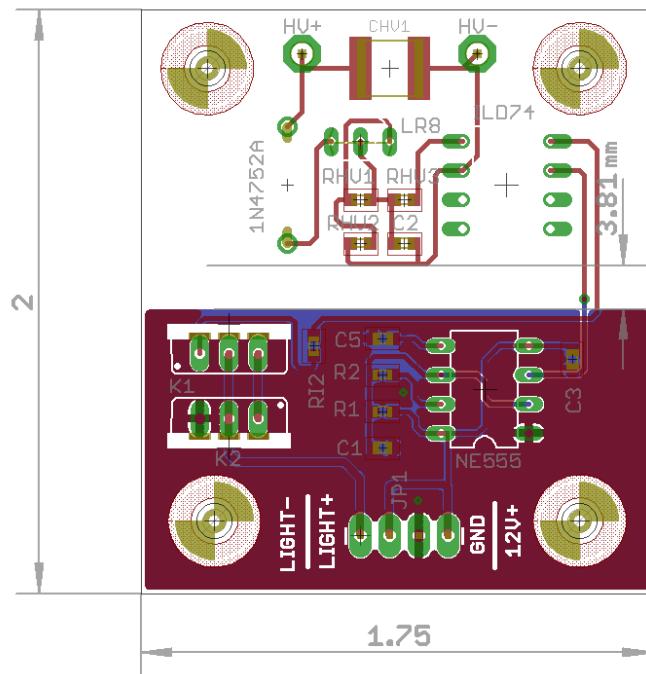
Board Layout of TSAL (board dimensions are in inches)
